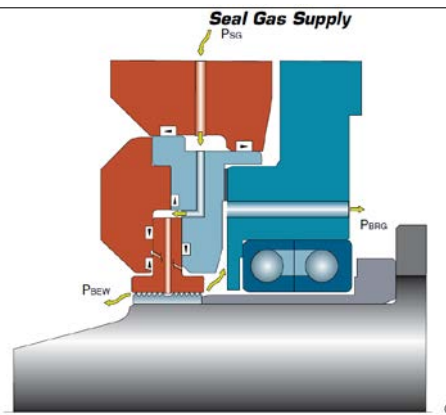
Floating Labyrinth Seal for Active Magnetic Bearings
